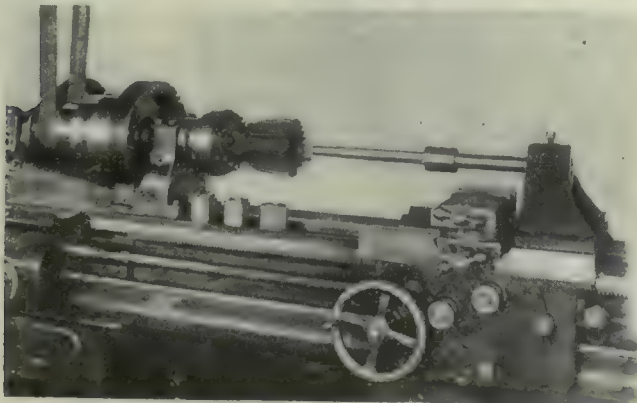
SPECIAL TOOLING ON ENGINE LATHE FOR BORING AIR COOLED ENGINE CYLINDERS.
